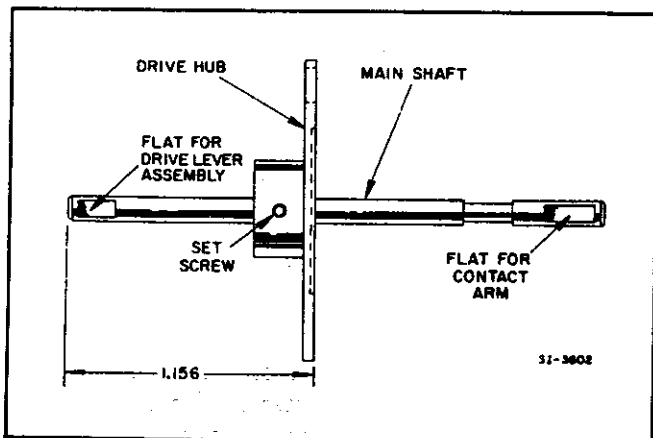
ADJUSTMENT OF THE CLUTCH DRIVE HUB
